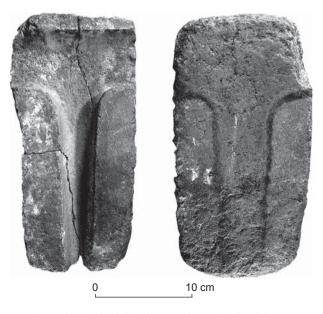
Chloritolite bivalve casting mold of a pickaxe.
